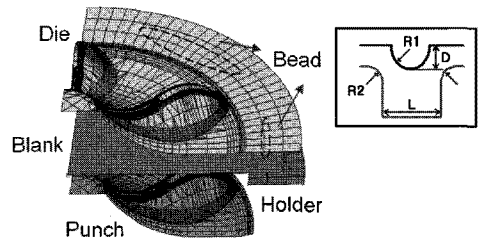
Initial setting of tools and the blank and shape of draw-beads for analysis
